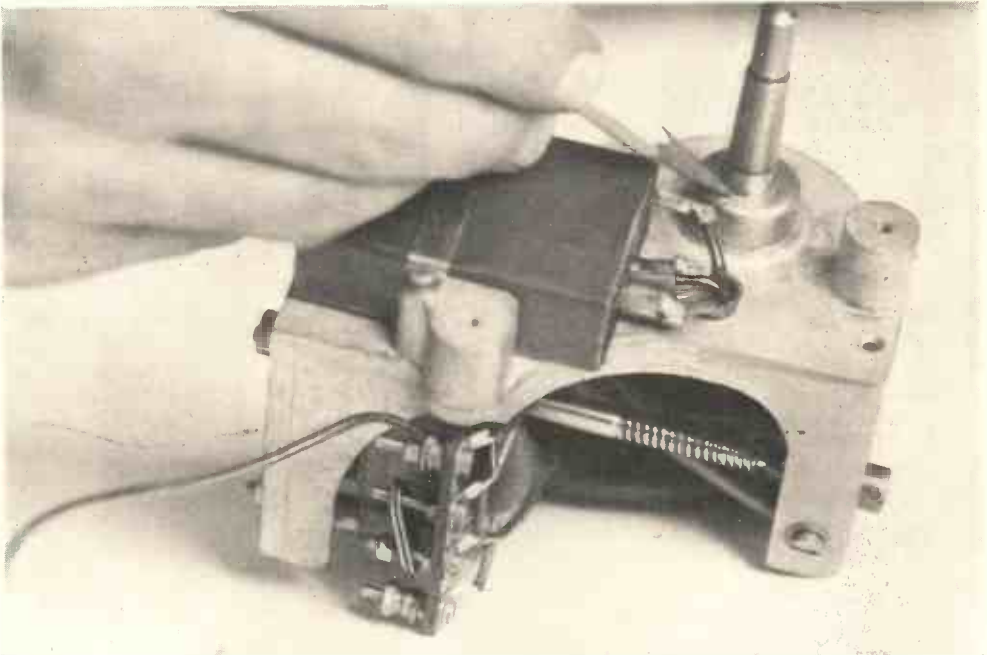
INDICATING THE OILING POINT OF THE UPPER MAIN BEARING SPINDLE.
